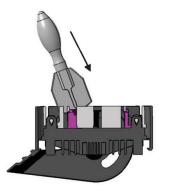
38-way connector, put on operating tool Abb. 6: Kabelbaumstecker 38 polig; ansetzten des Betätigungswerkzeuges
